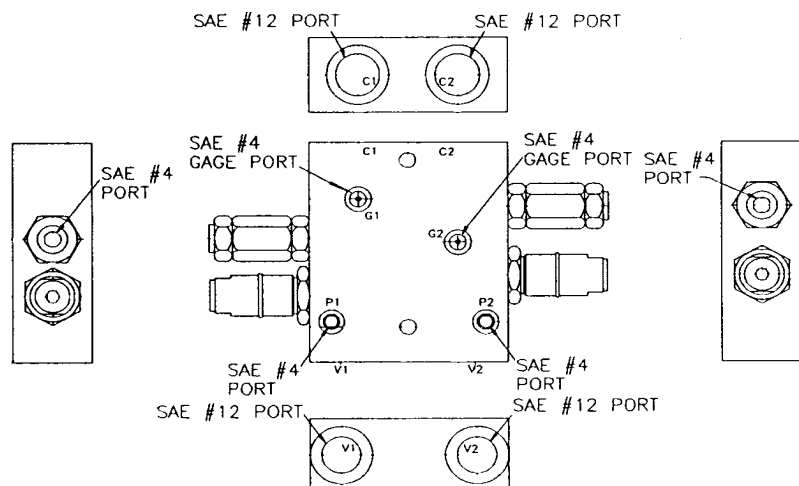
DETAIL-INLINE SWING VALVE W/CBV (70733050)
